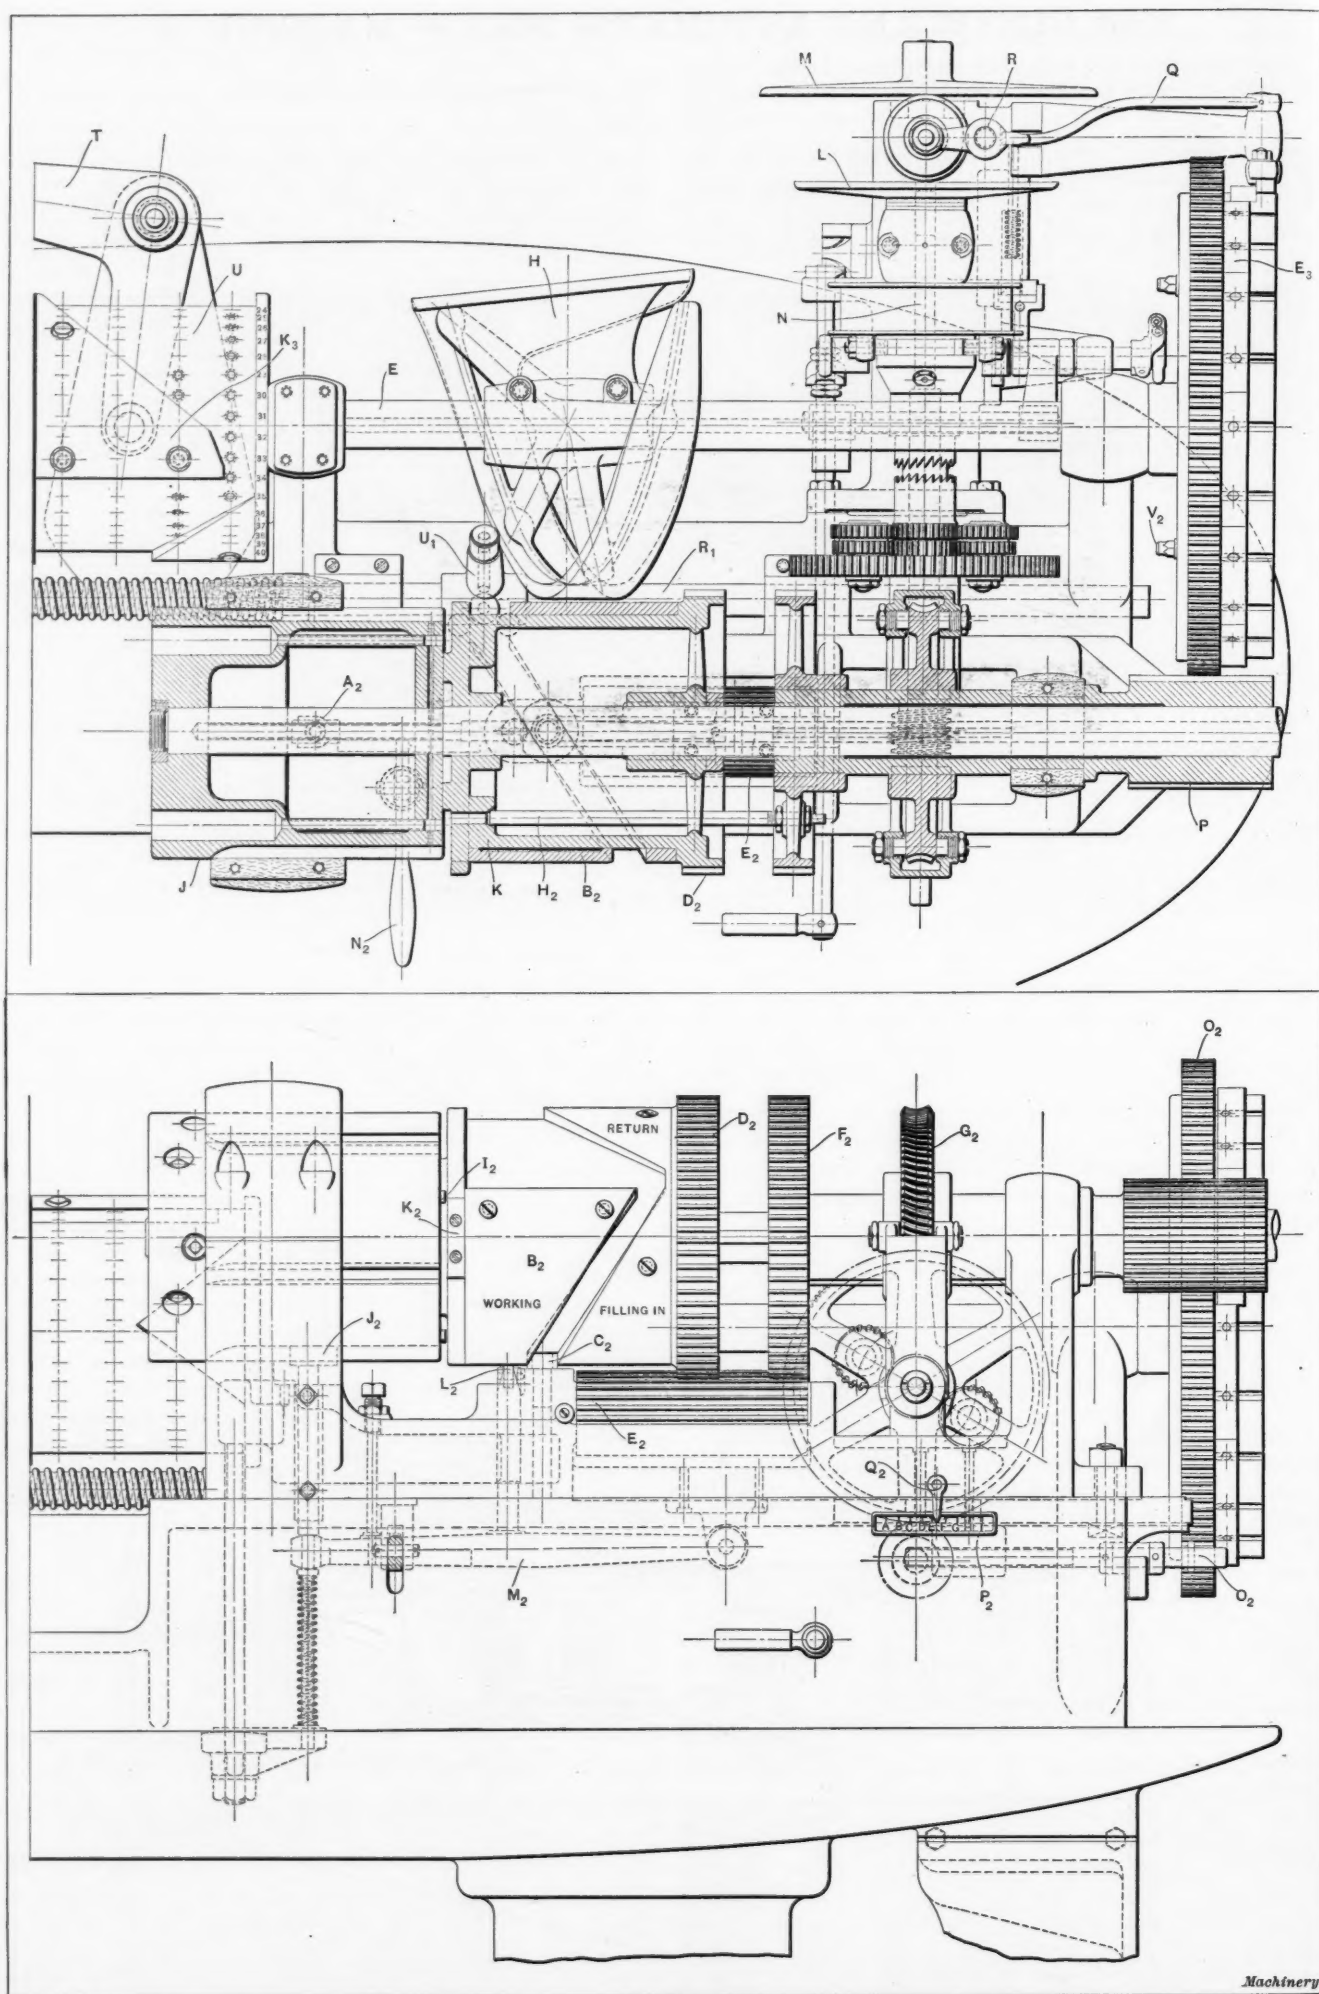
Sectional Plan View of Turret End of Cleveland Automatic, showing Construction of Turret, Regulating Drum and Auxiliary Mechanism. Fig. 14. Front Elevation of Turret End of Cleveland Automatic
